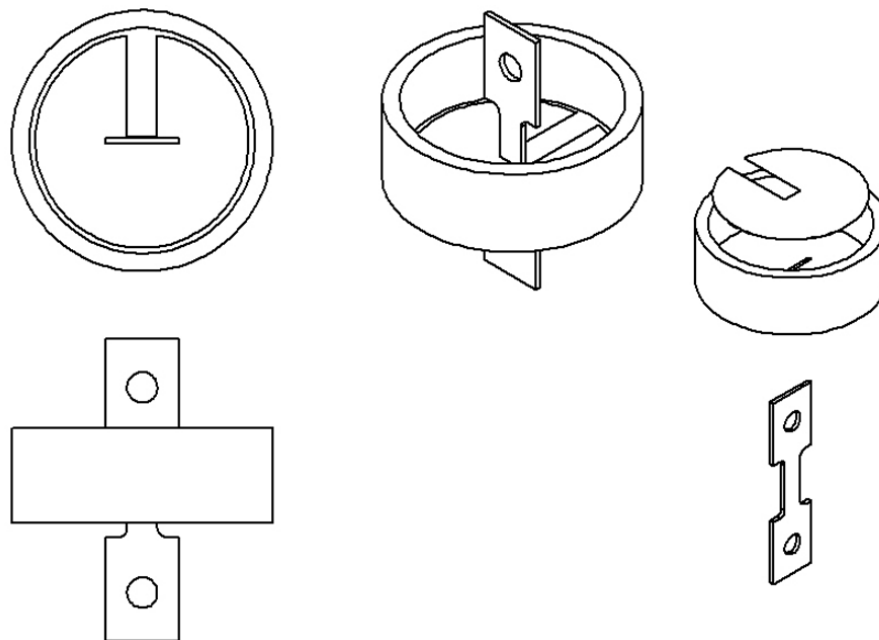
SolidWorks images showing assembly of the lead containment apparatus.
